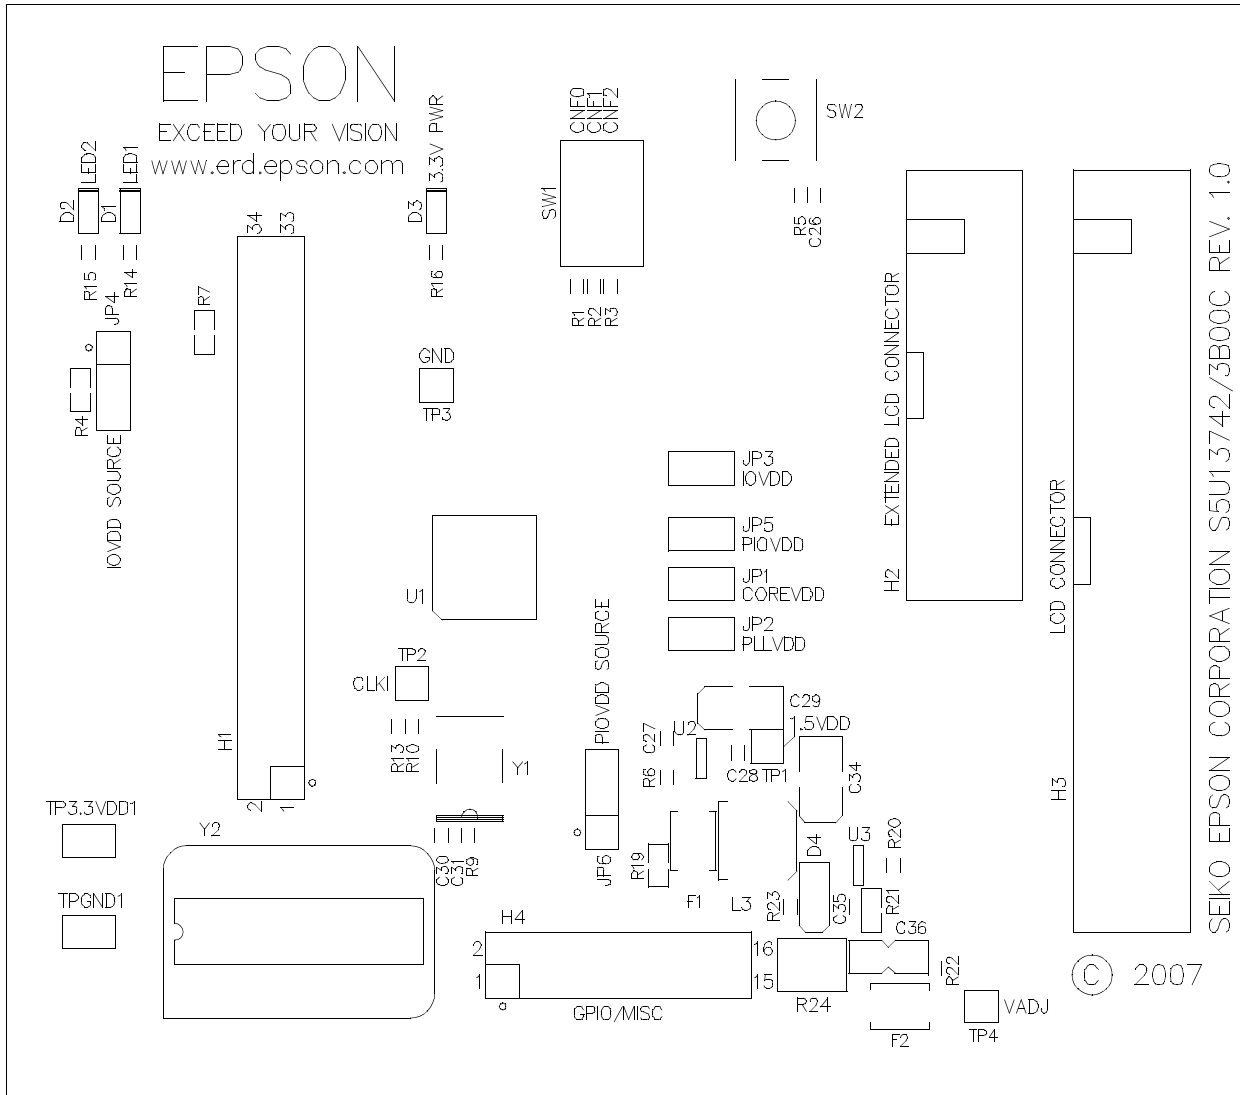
S5U13742P00C100 Board Layout - Top View
